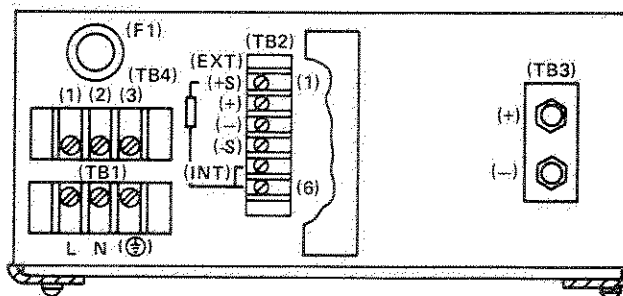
+/-15 V Dc Power Supply Assembly (7329140G1) Parts Location Diagram
